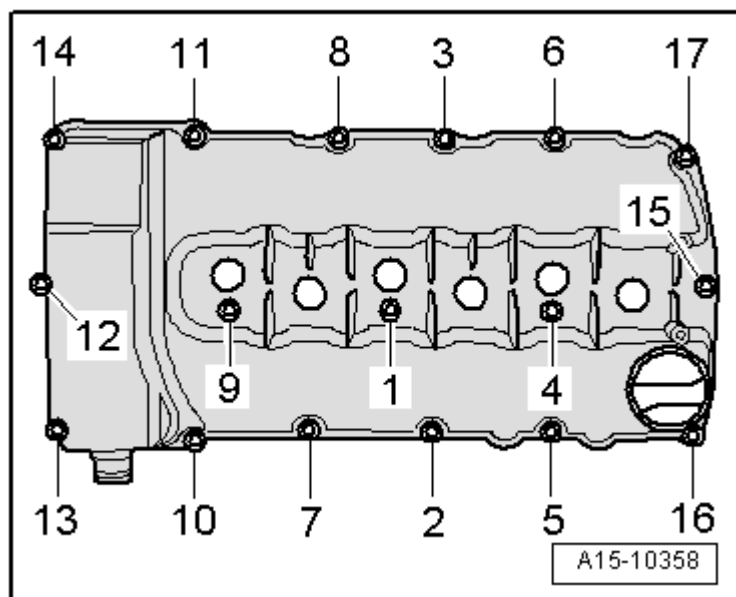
Cylinder Head Cover Bolt Tightening Sequence
